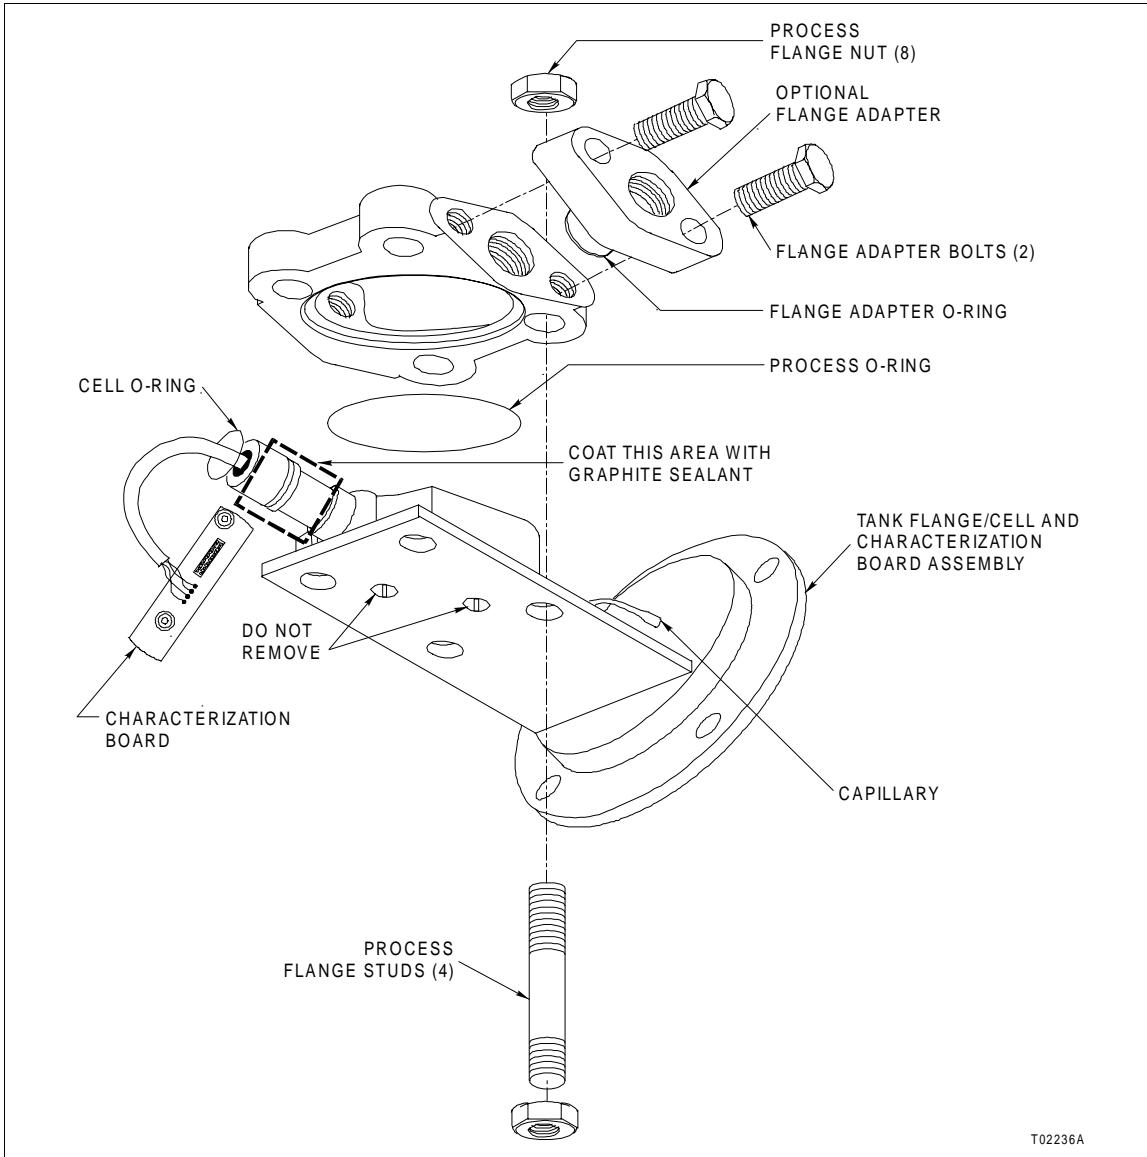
Tank Flange/Cell and Characterization Board Assembly
